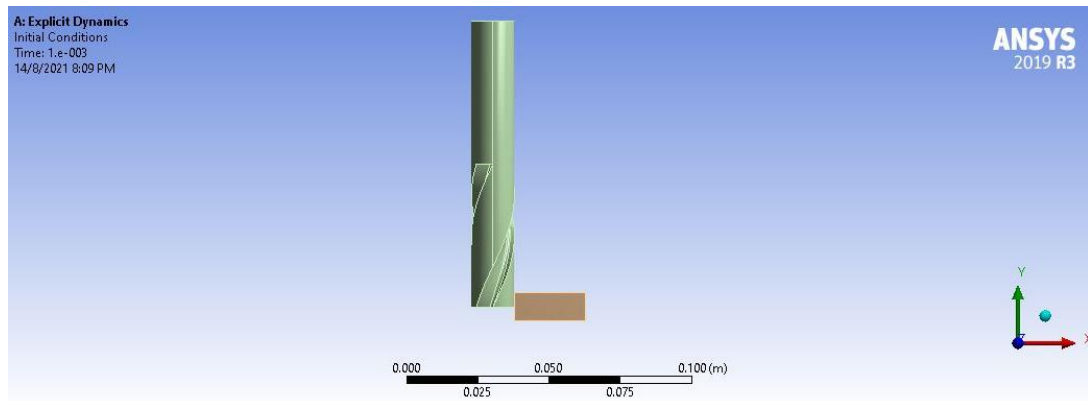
Side view of the machining simulation ANSYS interface that showing the cutting tool and the workpiece
